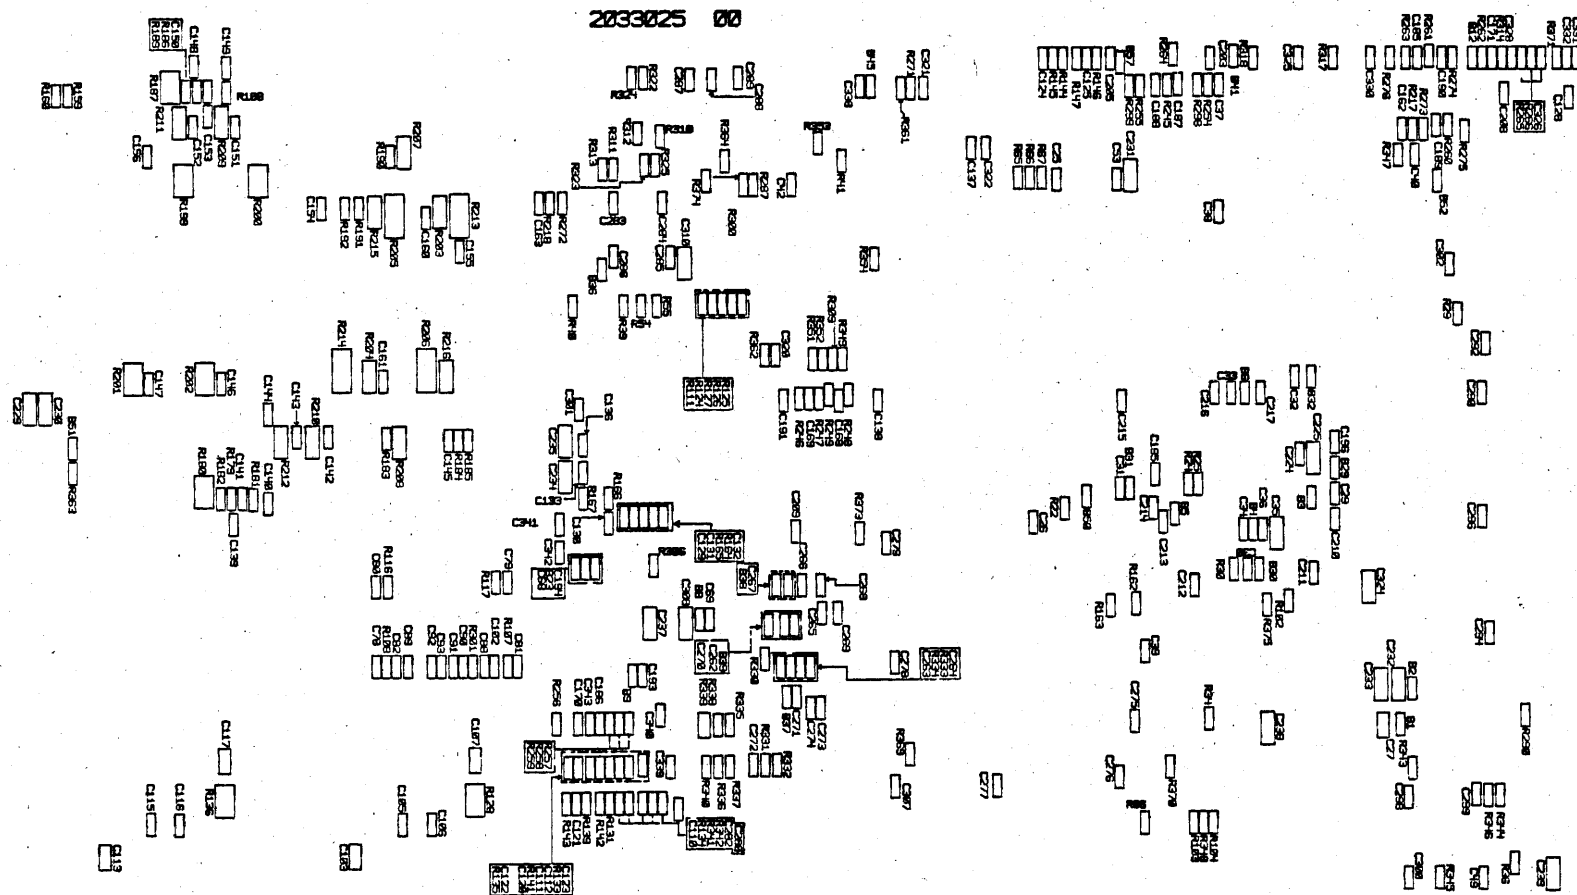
C299MAIN Board Component Layout of Soldering Side
